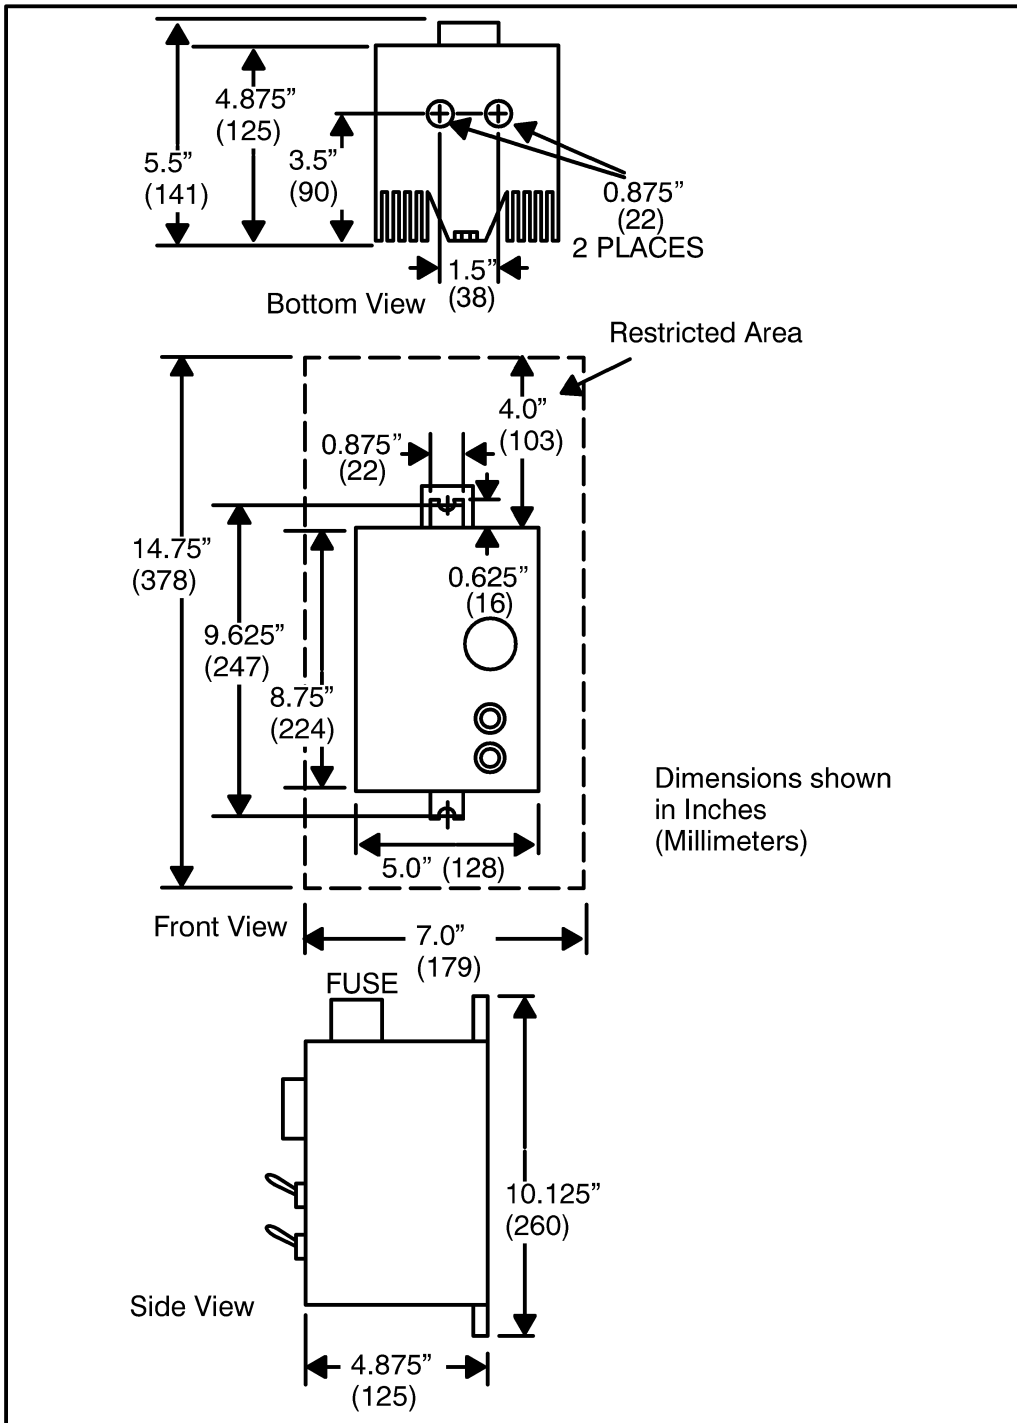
B. Dimension and Mounting Data for 1365-SAF, 1365-DAF, 1365-PAF, 1365-TAF.
